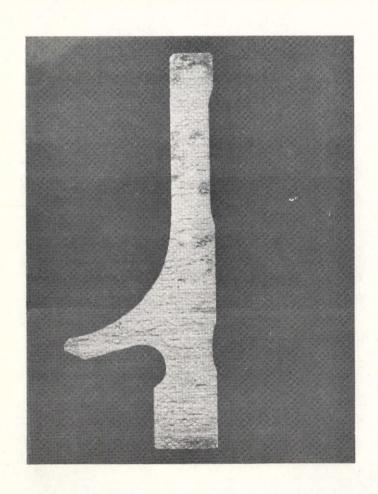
Oil Dam and Heat Shield, Crack Surface.
